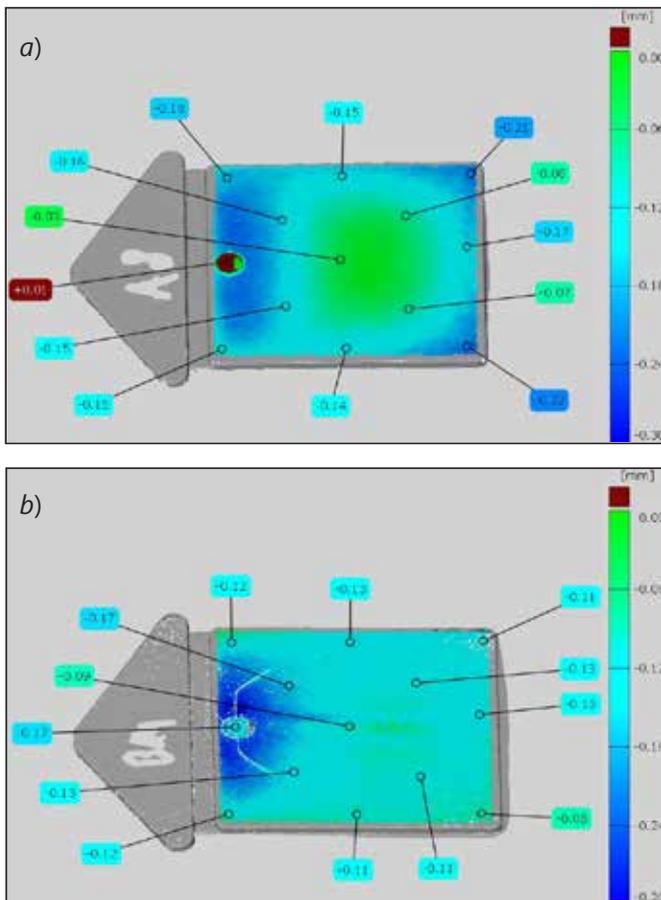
Measuring surface deviations on (a) test specimen 8 produced on new tool steel insert, (b) test specimen 14 produced on tool steel insert with visible signs of a macro-crack.
